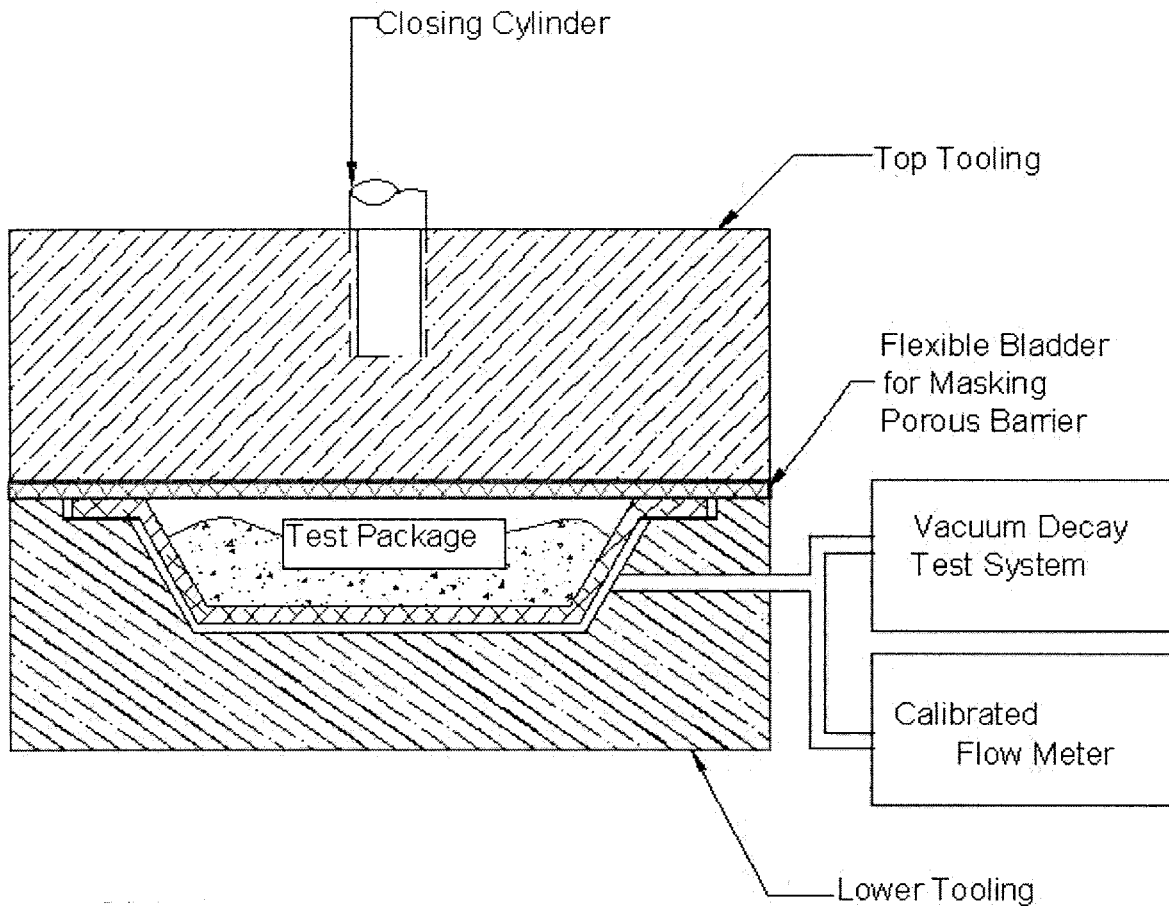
Schematic of Fixture and Porous Barrier Lidded Test Package
